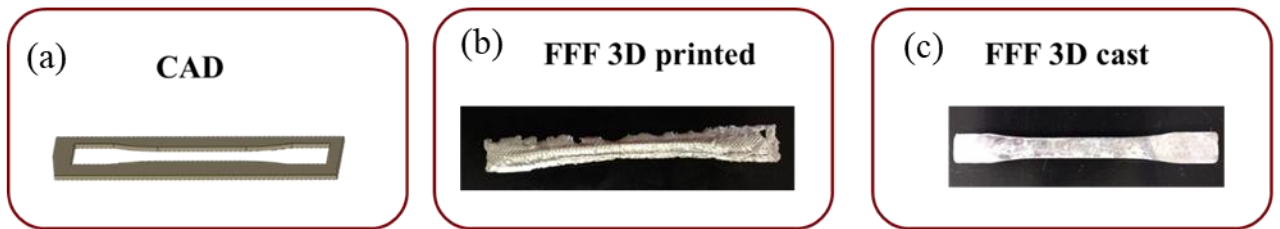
(a) SolidWorks design of the tensile mold (b) FFF 3D Printed tensile specimen (c) FFF 3D Cast tensile specimen
